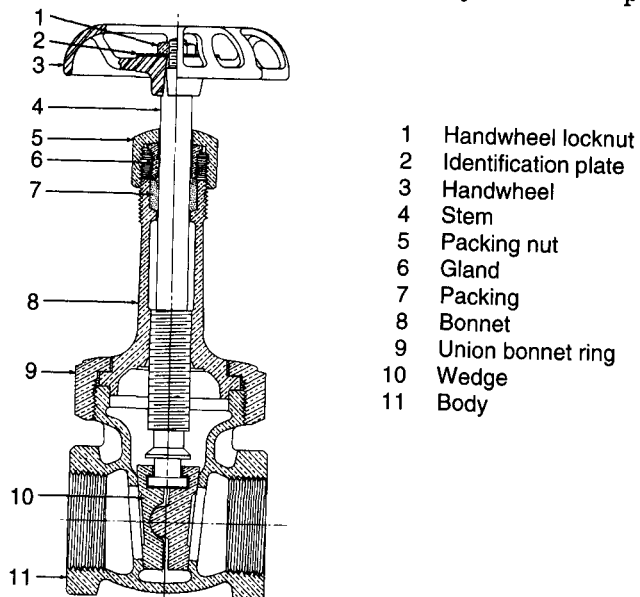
Rising-stem, union bonnet, split-wedge disk, inside screw gate valve. Courtesy Crane Company.
